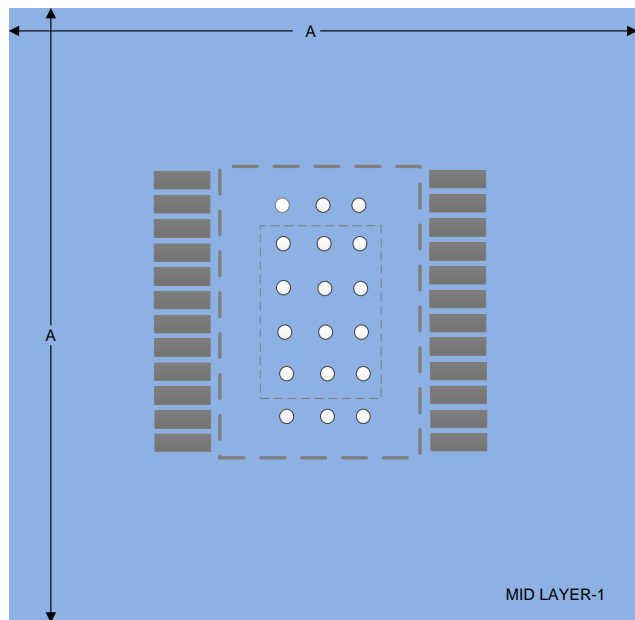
PCB - Mid Layer-1 (4-Layer PCB)
